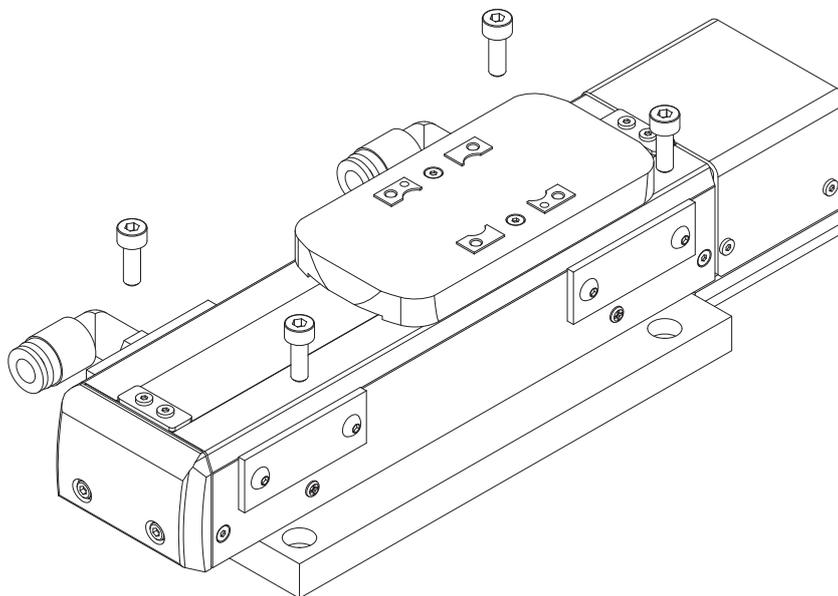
Drawing for mounting CKRF6 Tap specification
